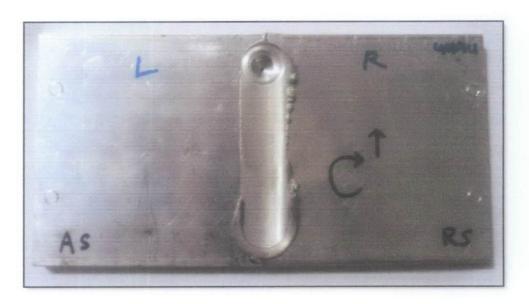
Sample 4, plates (Triangular tool, 50 mm/min)
